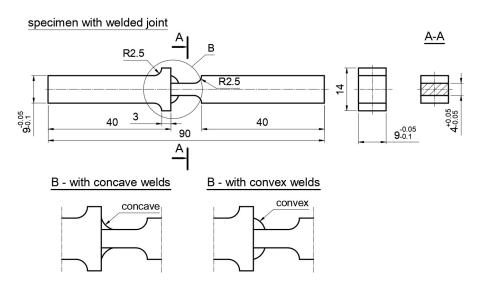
Geometries of specimen with: (a) concave welds, (b) convex welds (dimensions in mm)
